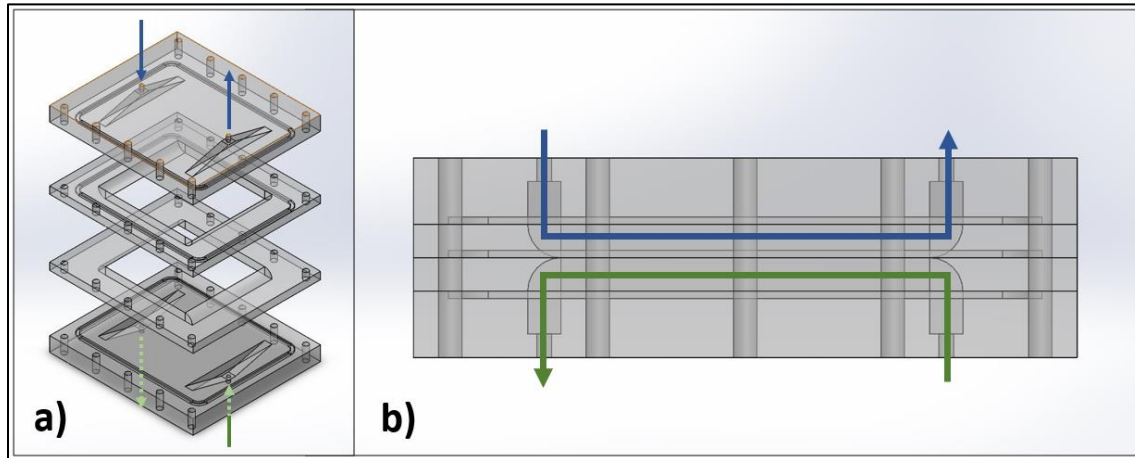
a) Solidworks exploded view of Memboxx 2.0. b) Solidworks collapsed side view of Memboxx 2.0.
